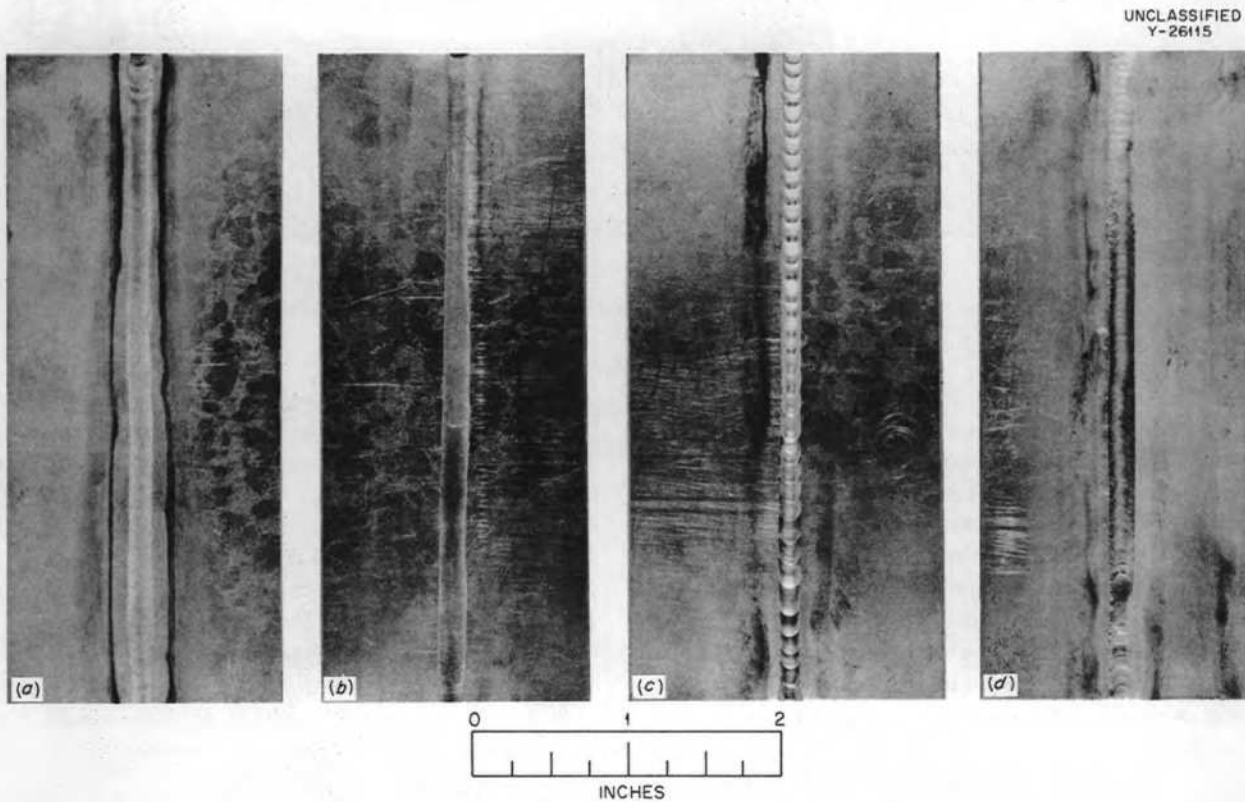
Butt Welds in Columbian Sheet Made with (a) the Addition of 85 wt % Zr-15 wt % Cb Filler Wire, (b) the Addition of 82 wt % Zr-15 wt % Cb-3 wt % Mo Filler Wire, (c) the Addition of 100 wt % Cb Filler Wire, and (d) Without Filler Wire. (Confidential with caption)
